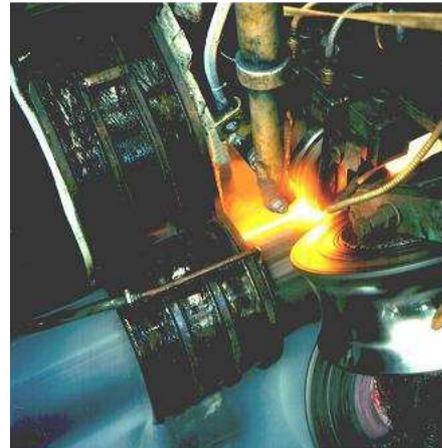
Example of the high frequency induction welding of tubes
